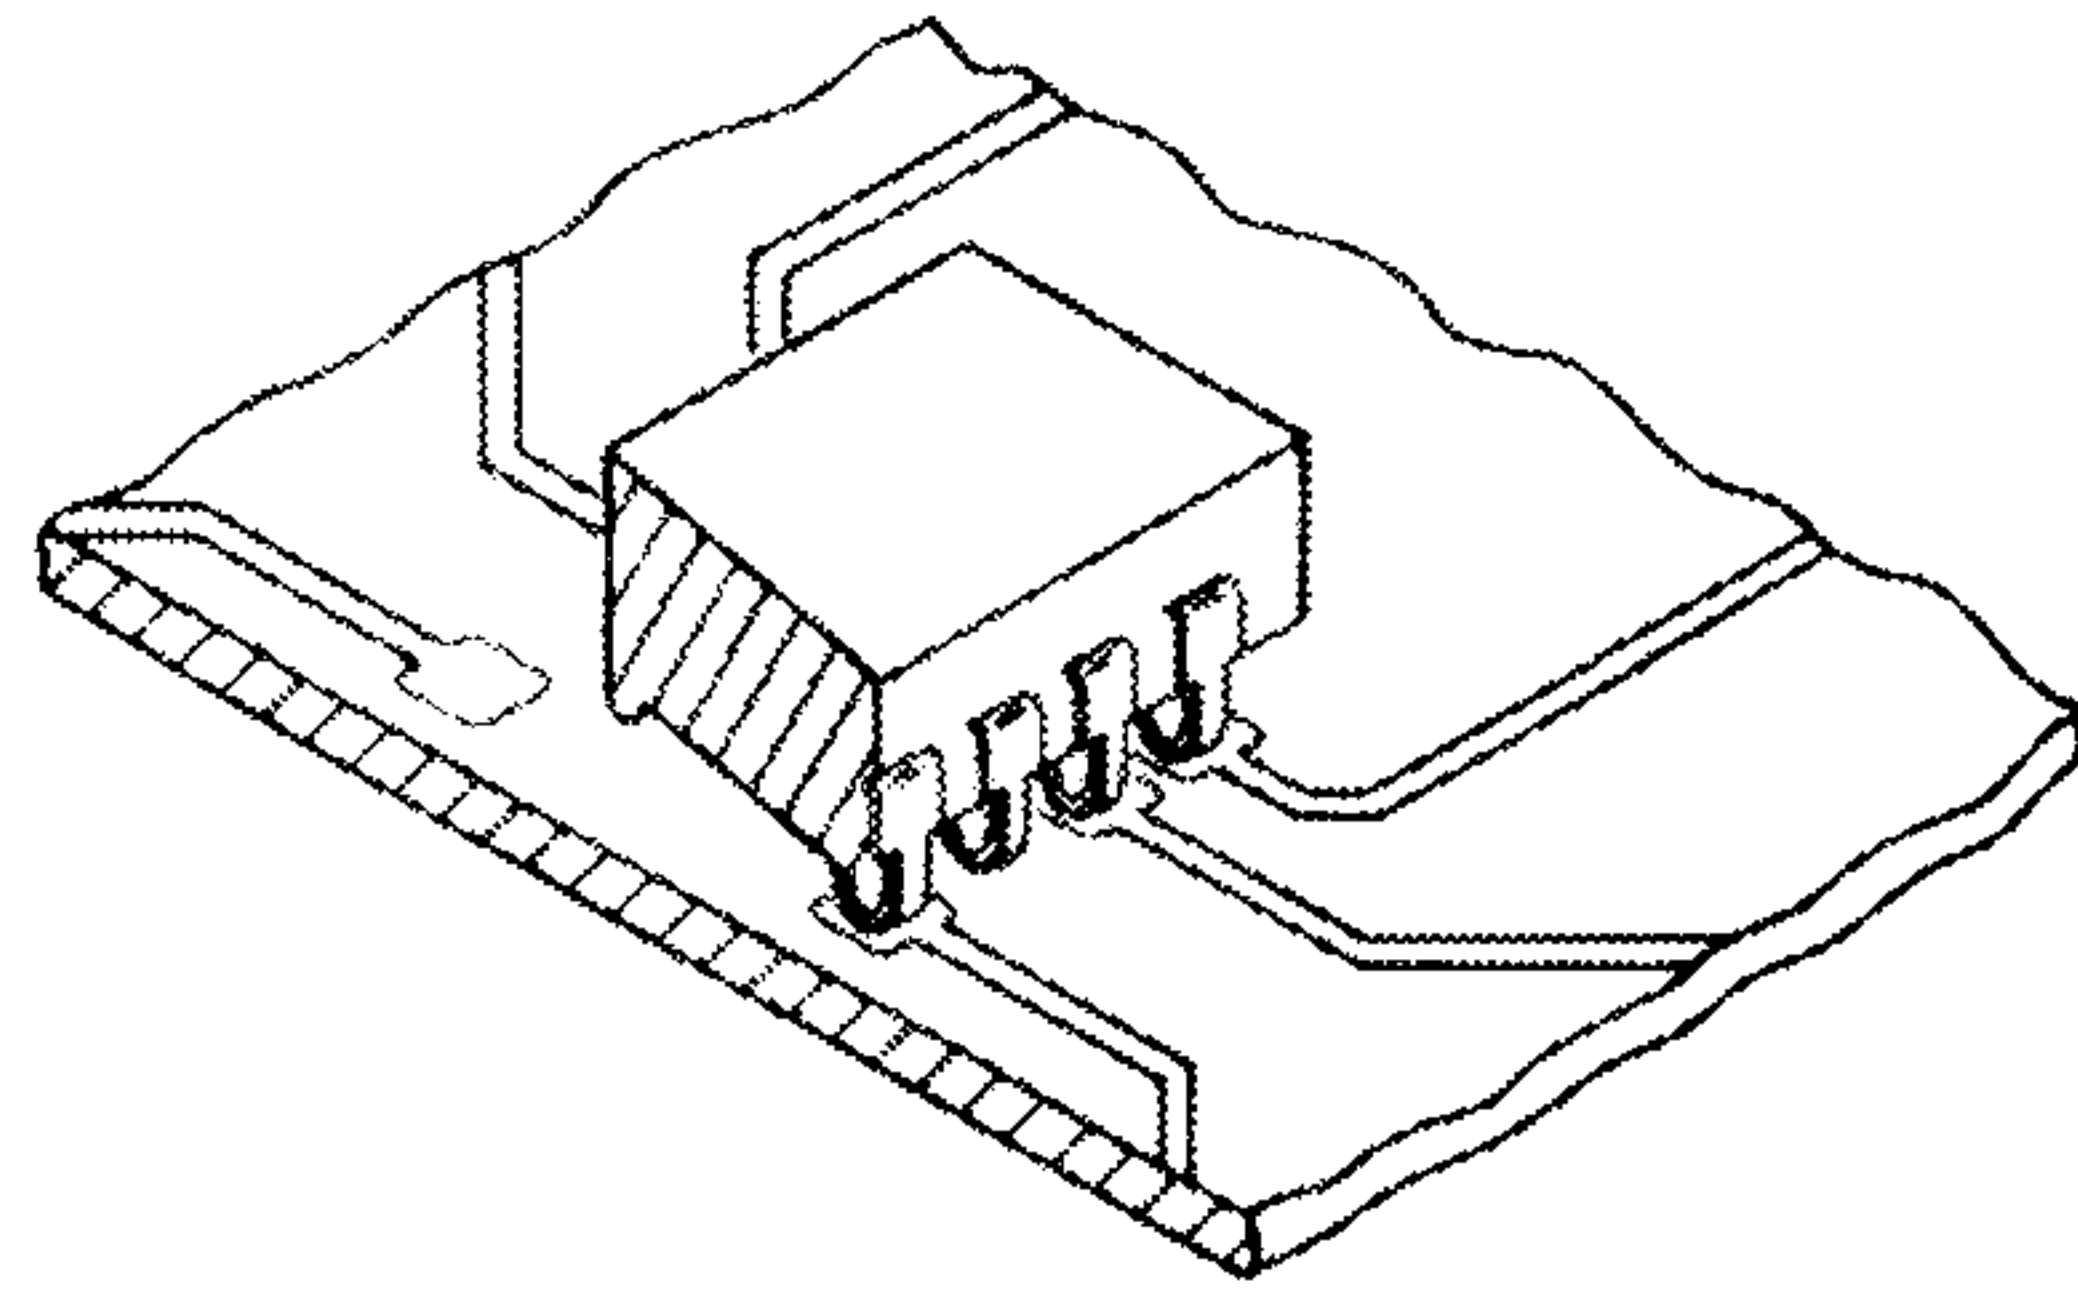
Chip carrier with J-leads for surface mounting.
